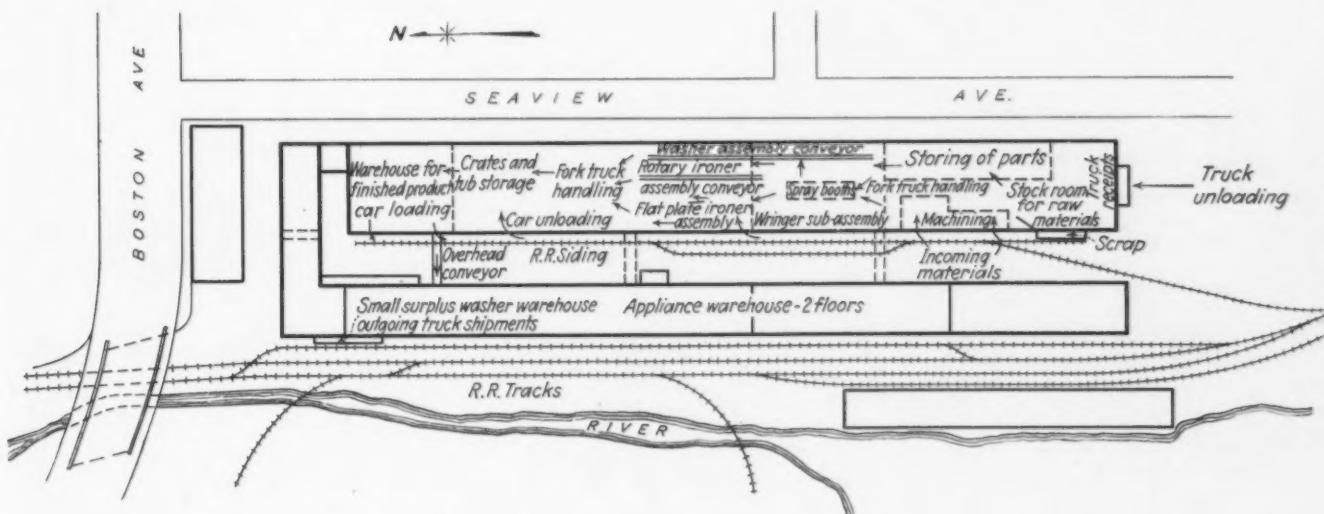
Schematic layout of department at Bridgeport Works laid out for fork truck and assembly conveyor handling.
